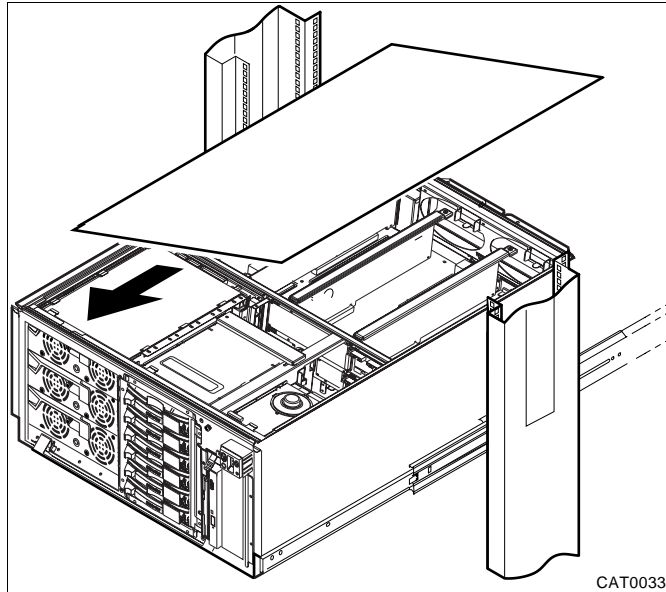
Removing/Replacing the Top Cover on a Rackmount
